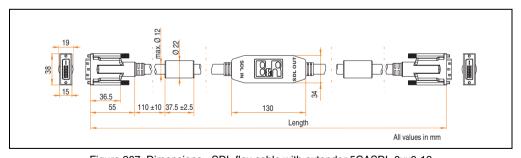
Dimensions - SDL flex cable with extender 5CASDL.0xx0-13
